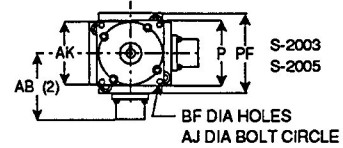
Explosion Proof Motor Mounting Dimensions.
